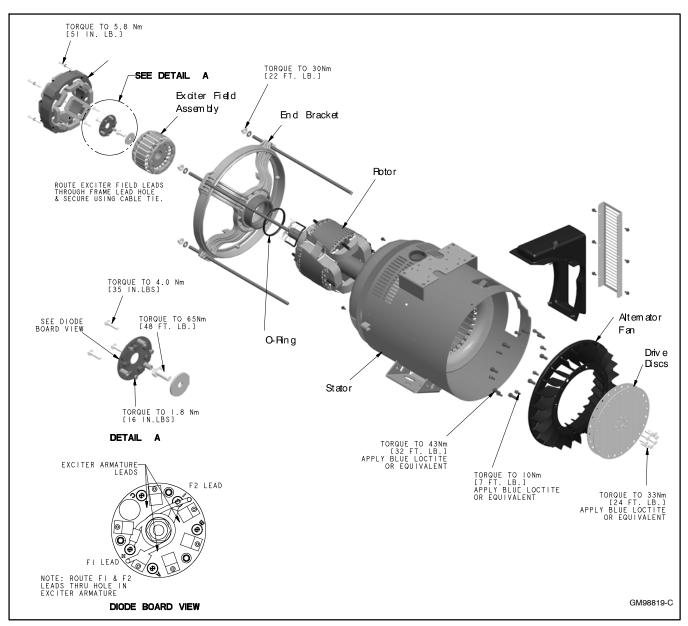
Alternator Assembly Torque Specs—13-24EKOZD and 11-20.5EFKOZD Models (Parts Shown May Vary Slightly Between Models)
